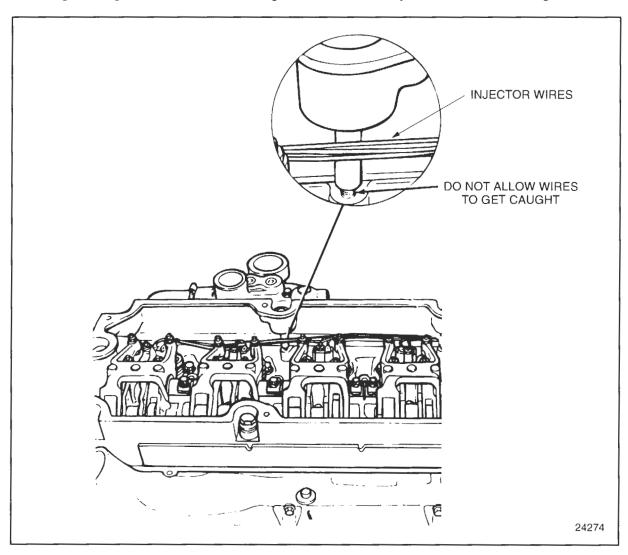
Rocker Cover Base Hold-down Bolt Installation
